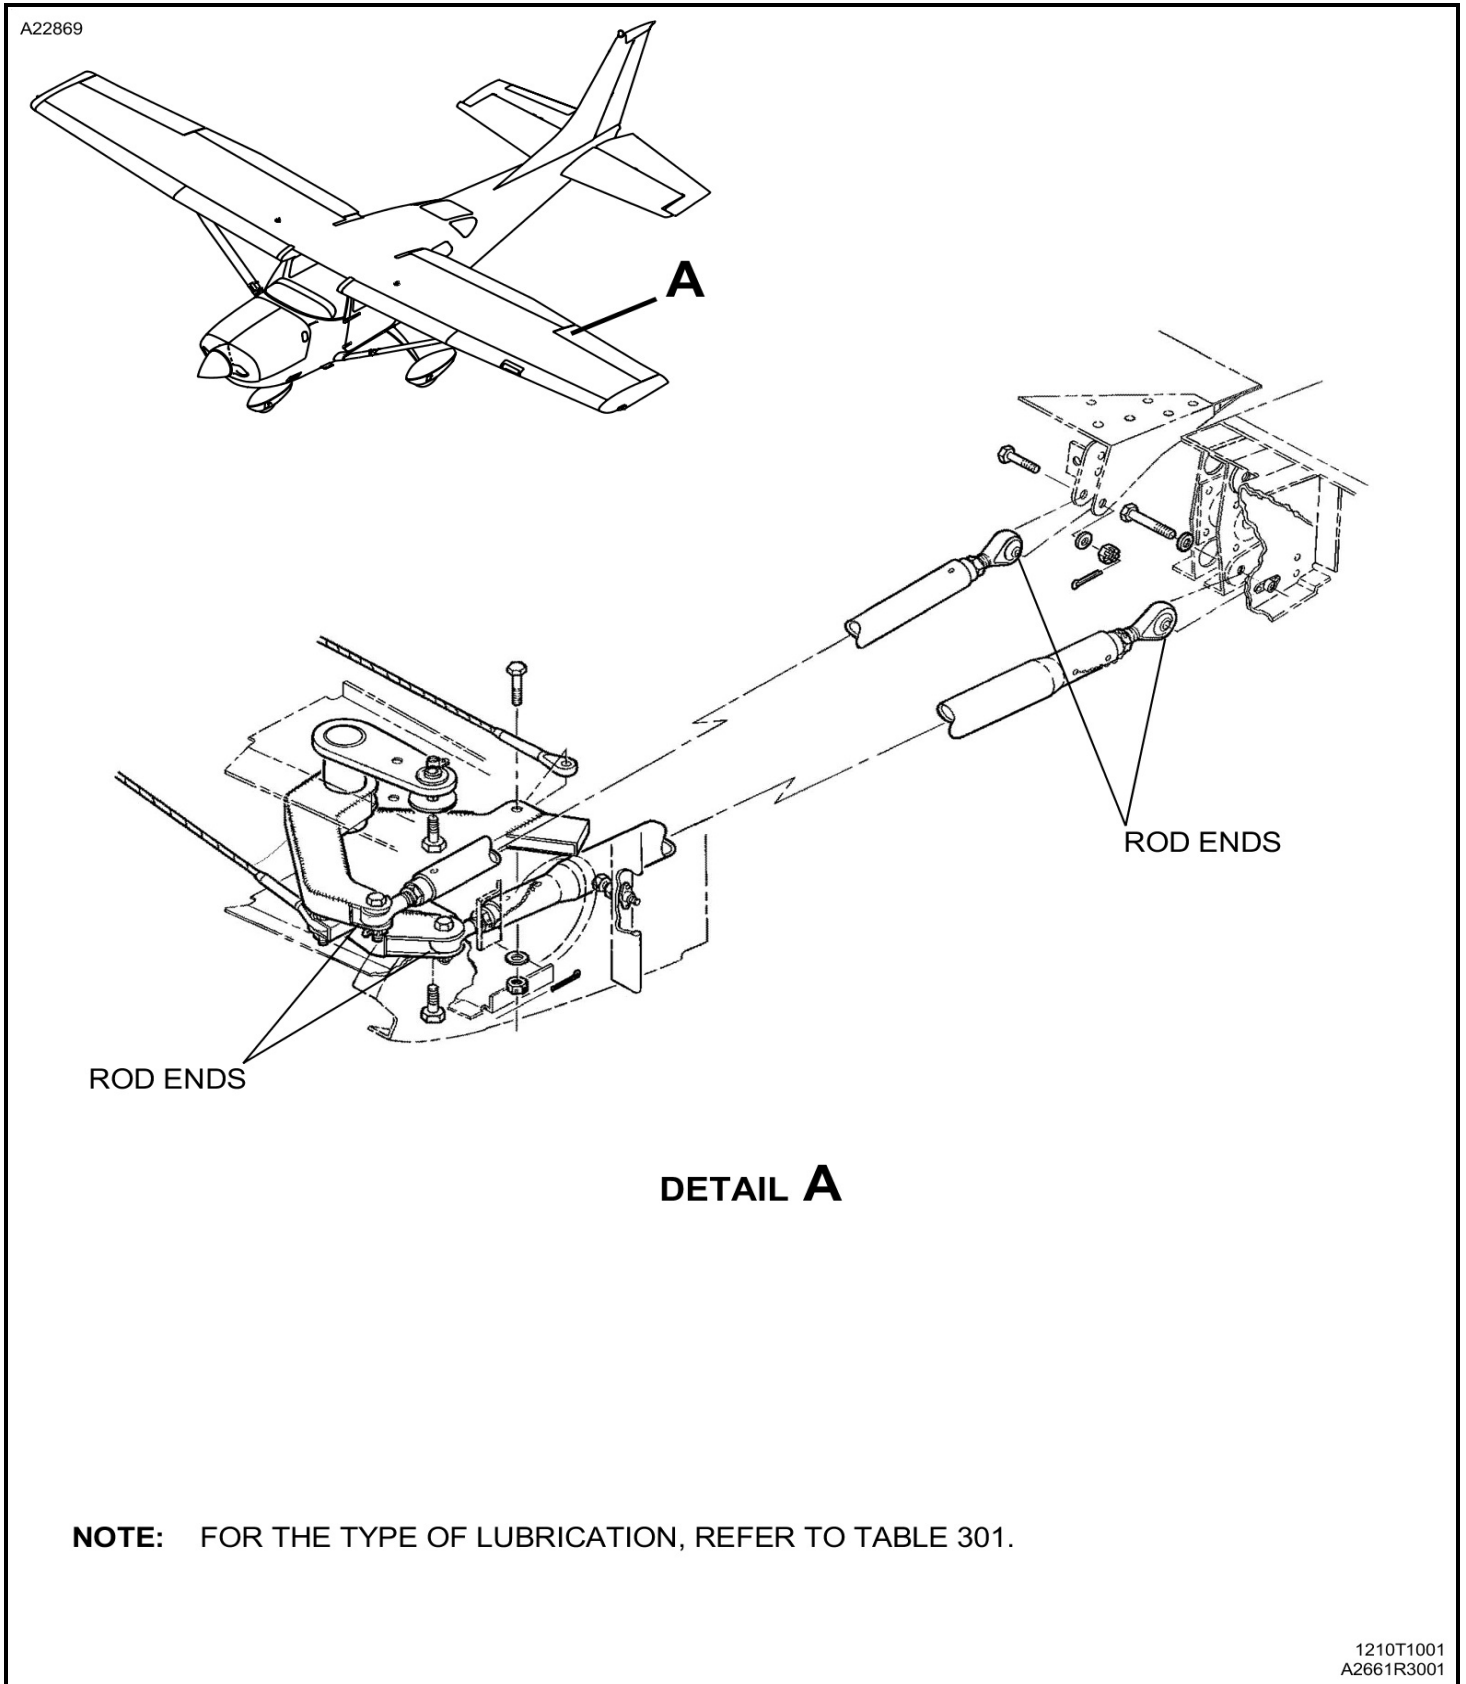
Sheet 1 : Aileron Trim Control Assembly Lubrication
